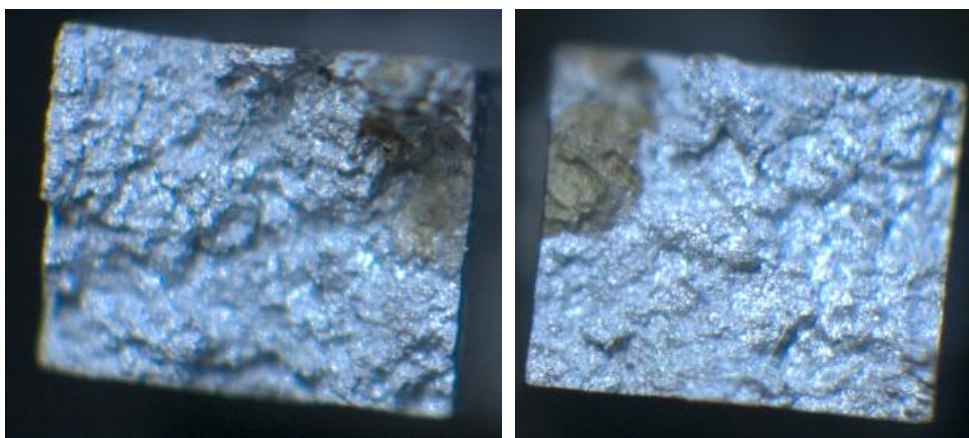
Double oxide film defect on the fracture surface of an AZ91 tensile test bar produced under a cover gas of 0.5%SF₆/CO₂. The dimensions of the fracture surface are 5 mm × 6 mm.
